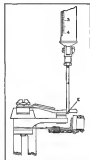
Method of checking length of roller arm spring. One end should extend 1/16 in. or spring will be excessively weak.
